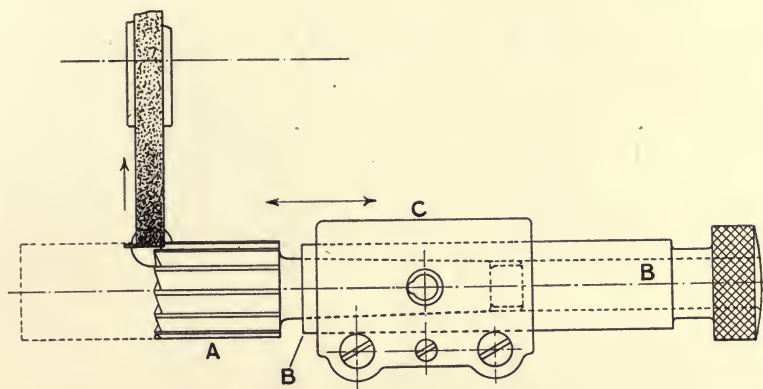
HEAD FOR SHARPENING PARALLEL MILLS—GUEST
